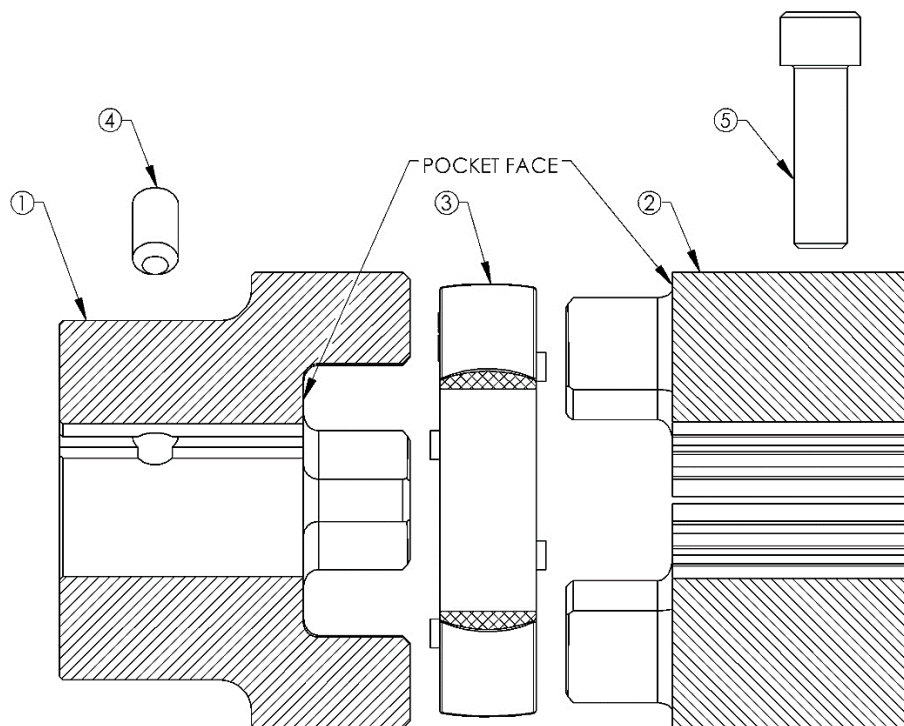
HORIZONTAL (T10) TAPER GRID COUPLING (EXPLODED VIEW)
